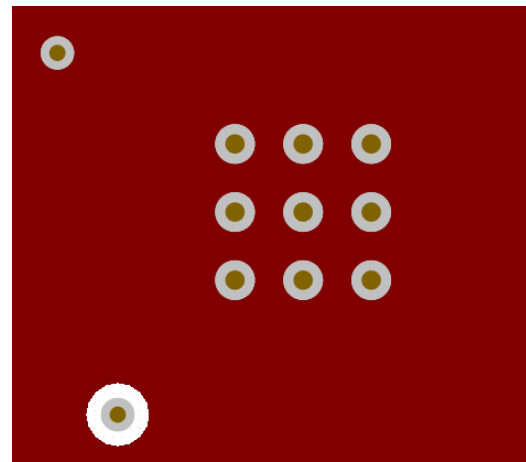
PCB Layout Example for LMK1D2104L, GND Layer
